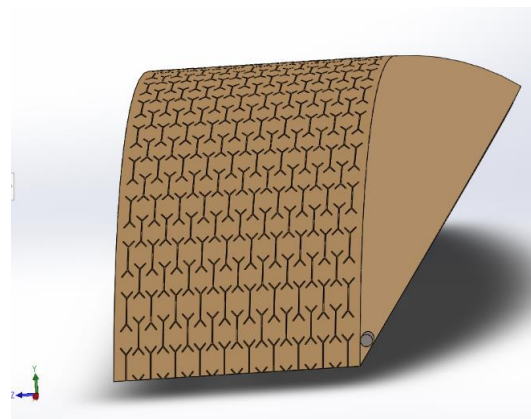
SolidWorks Model of Shoulder Pad in its compressed form
